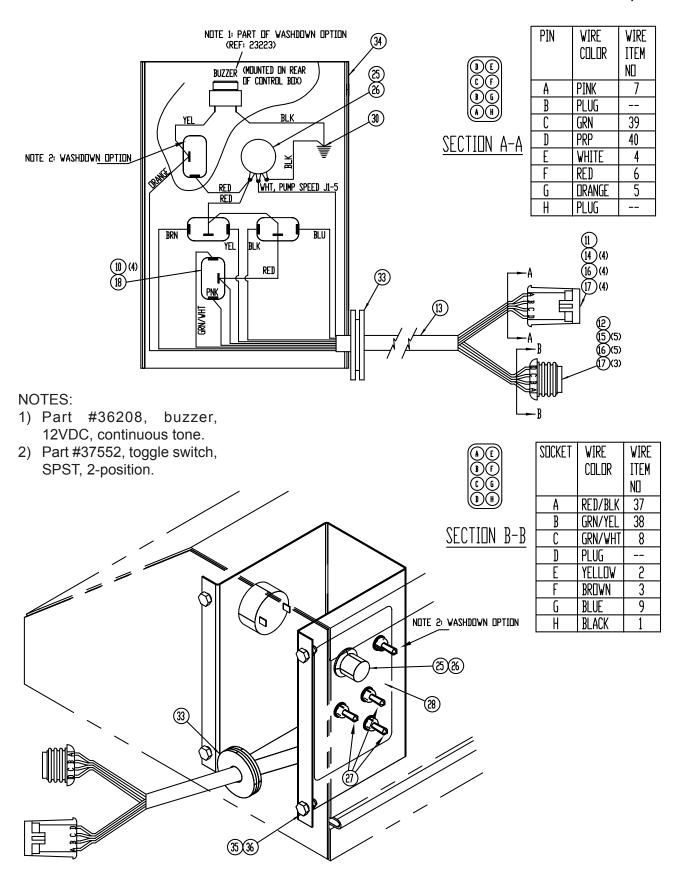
REAR CONTROL BOX ASSEMBLY
